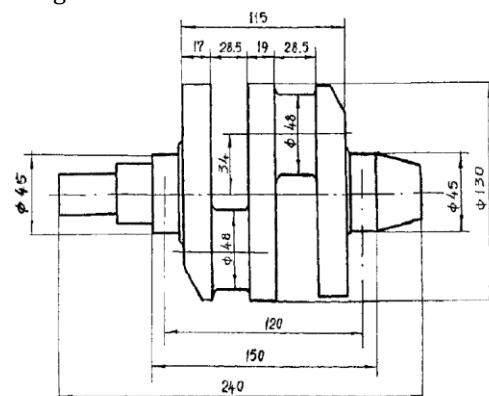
2d drawing showing the dimensions of the forged steel crankshaft
